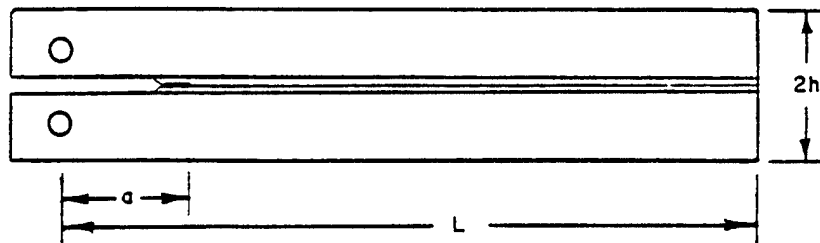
Double Cantilever Beam (DCB) Specimen with Side Grooves.
